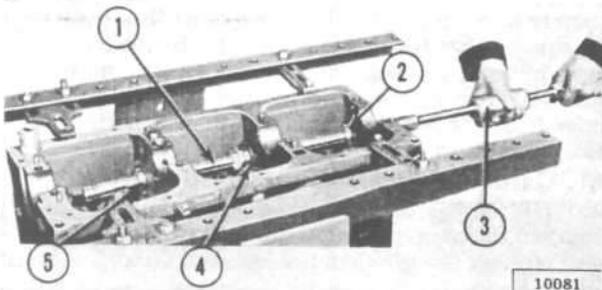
INSTALLING CAMSHAFT BEARINGS
